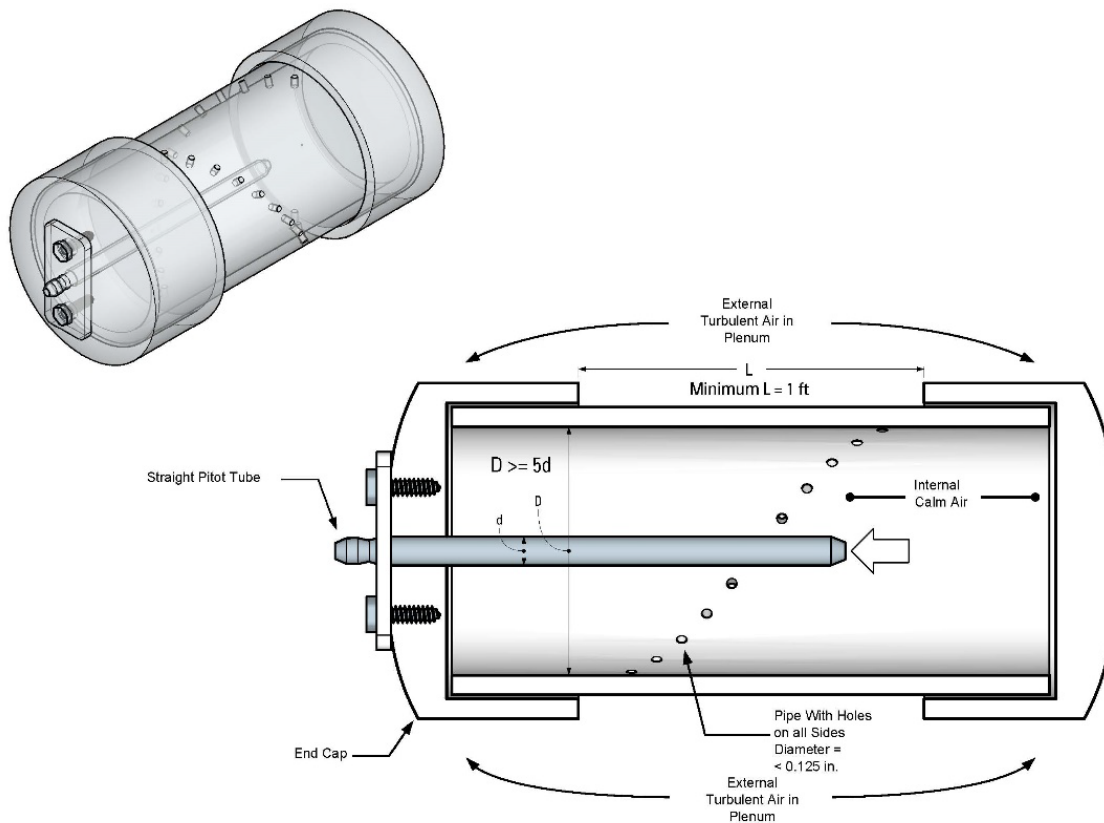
Static Pressure Measurement Assembly for Turbulent Environments
